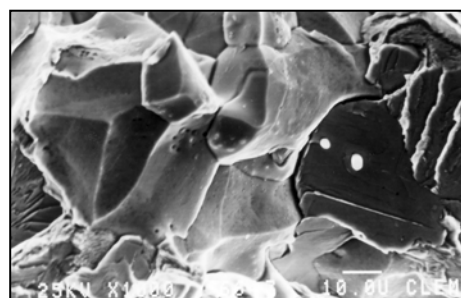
Smooth intergranular facets on fracture surface, centerline zone of slab B.
